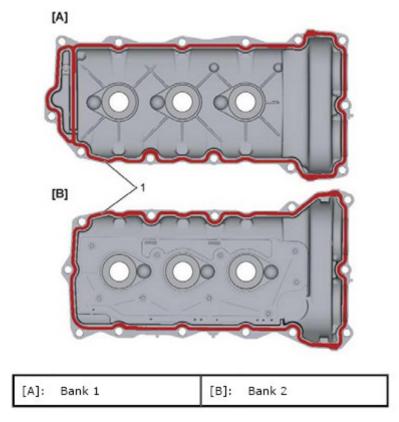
Identifying Cylinder Head Cover Gasket Courtesy of SUZUKI OF AMERICA CORP.
